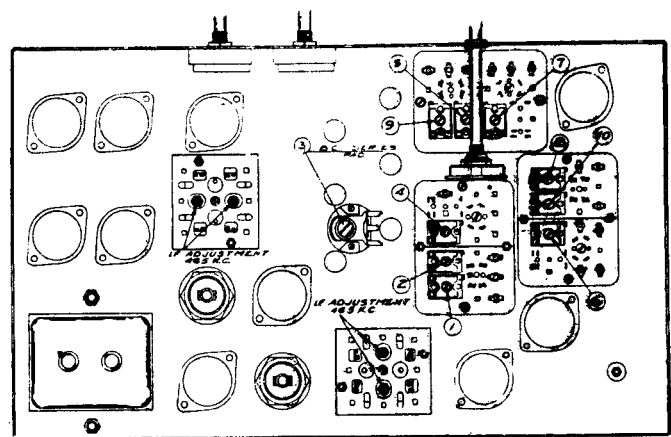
BOTTOM VIEW SHOWING TRIMMERS
